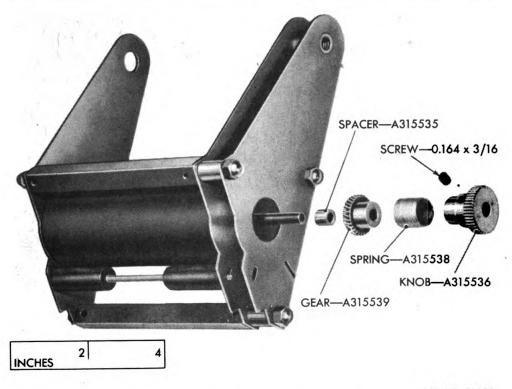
Paper Guide Support Plate Exploded From Paper Transport Assembly
